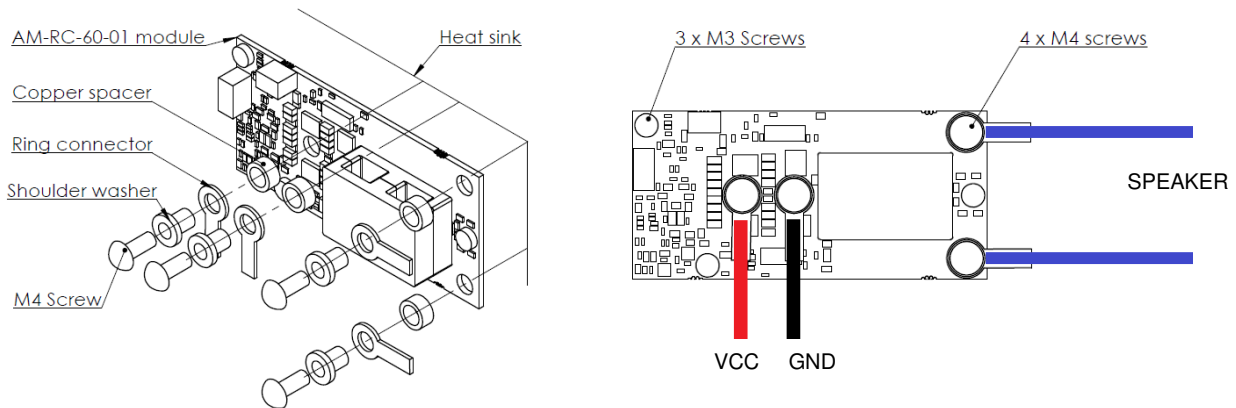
Mounting guidelines for the AM-RC-60-01 module
